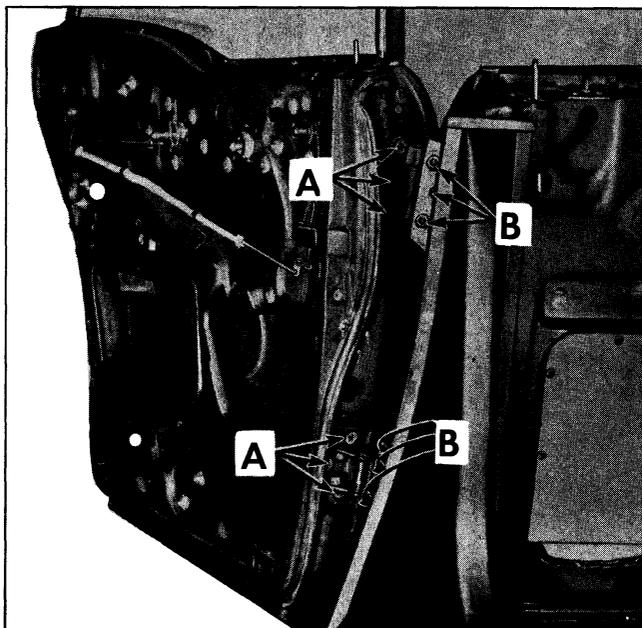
Rear Door Hinge Adjustment (HS)
